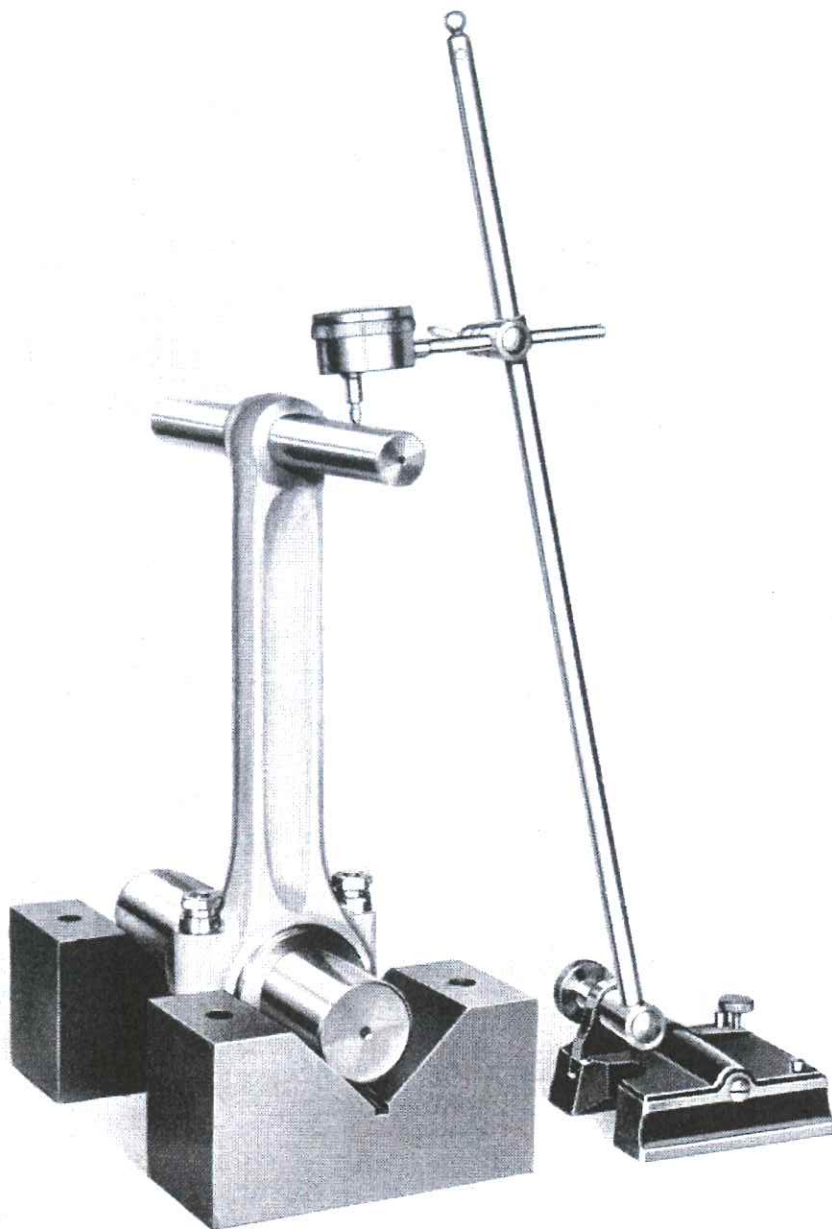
Checking gudgeon pin hole for alignment, using clock indicator.
